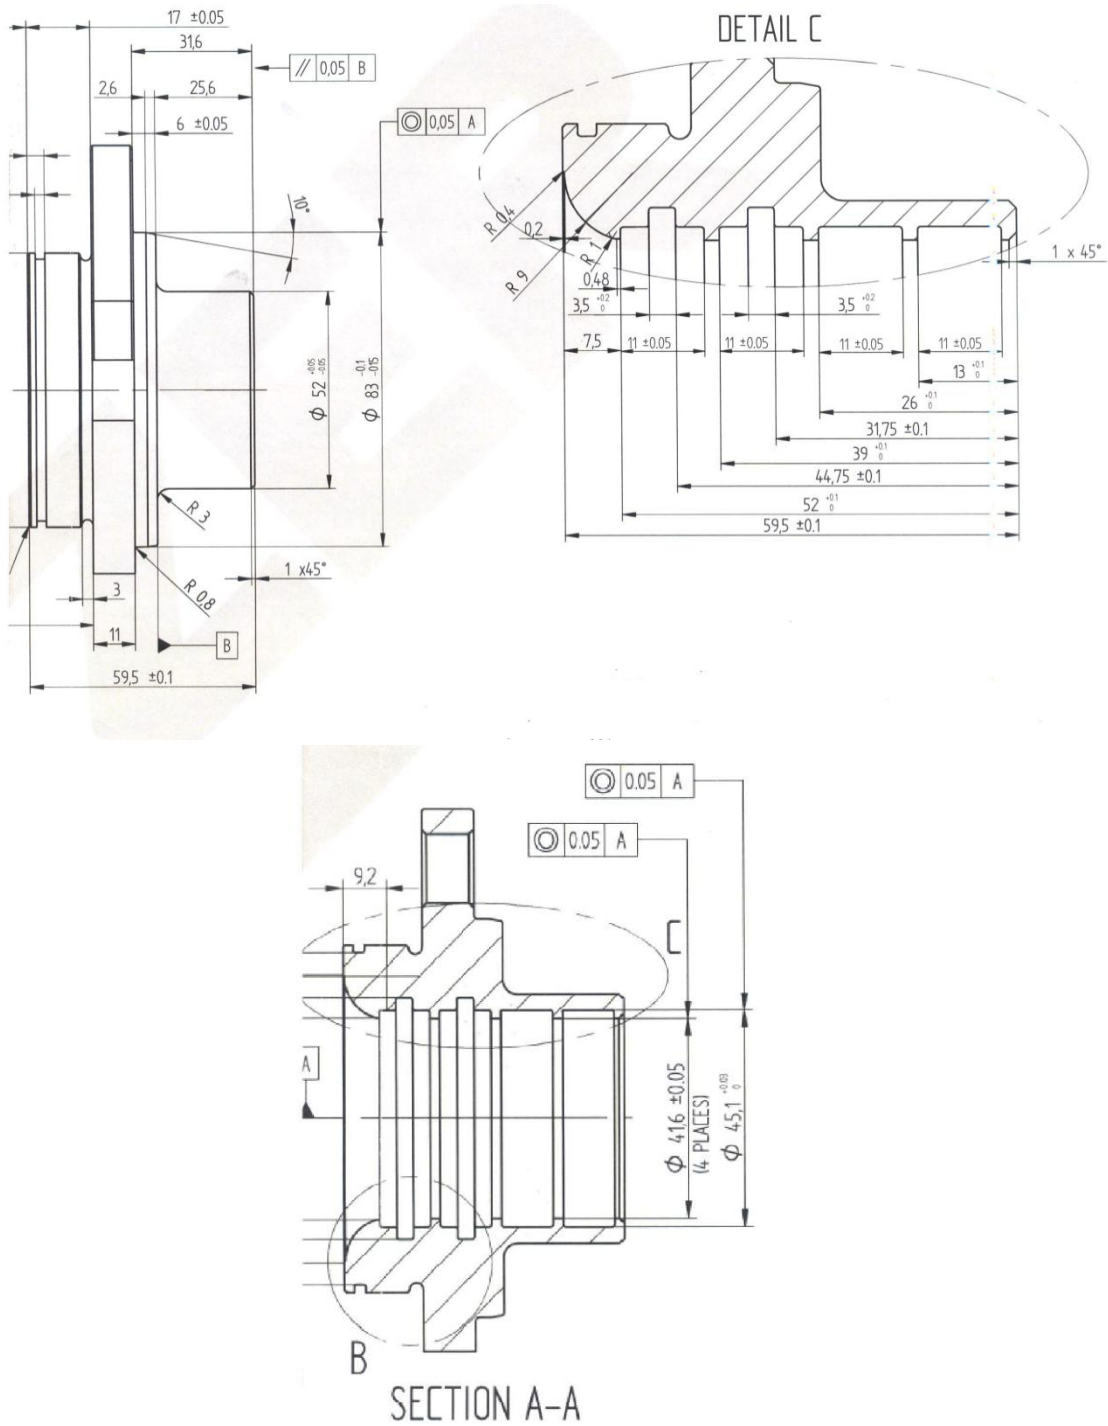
Detailed dimensions of final component, showing the part dimensions and tolerances
